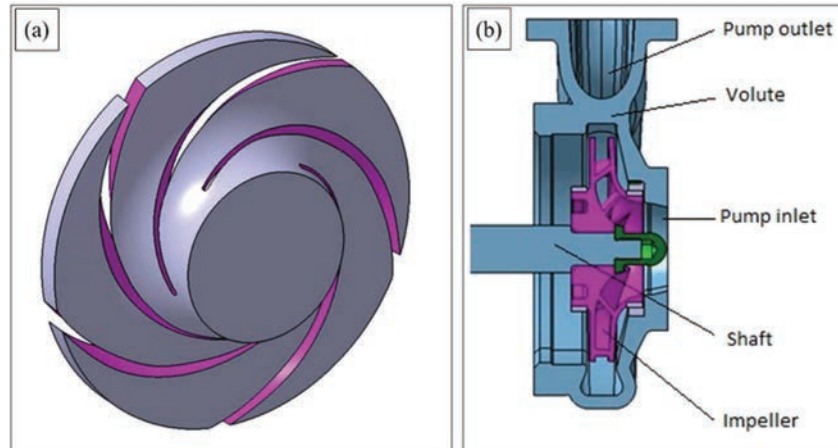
(a) Hydraulic profile of impeller and (b) Assembled model of centrifugal pump.
